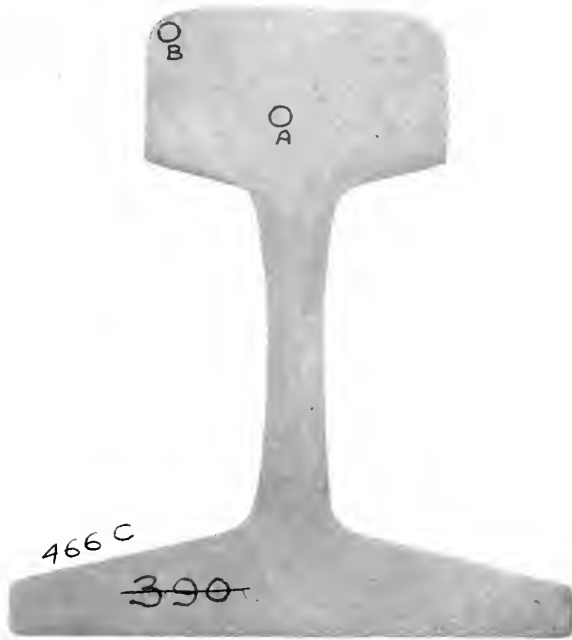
C. LIGHT ETCHING OF RAIL 466.
